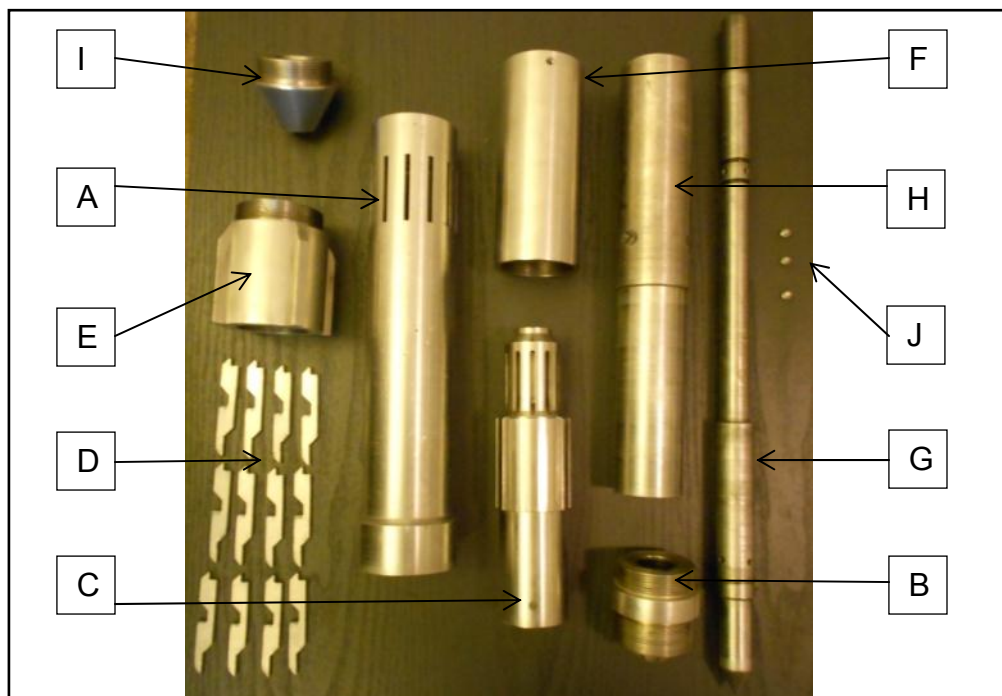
Probe pieces labeled for assembly: (A) upper chamber/outer shell; (B) ramped connection; (C) tracked male inner core; (D) 12 keys; (E) friction reducer with wings; (F) tracked lower chamber; (G) inner rod with knob; (H) AWJ connection; (I) cone shaped tip; (J) 3 set screws
